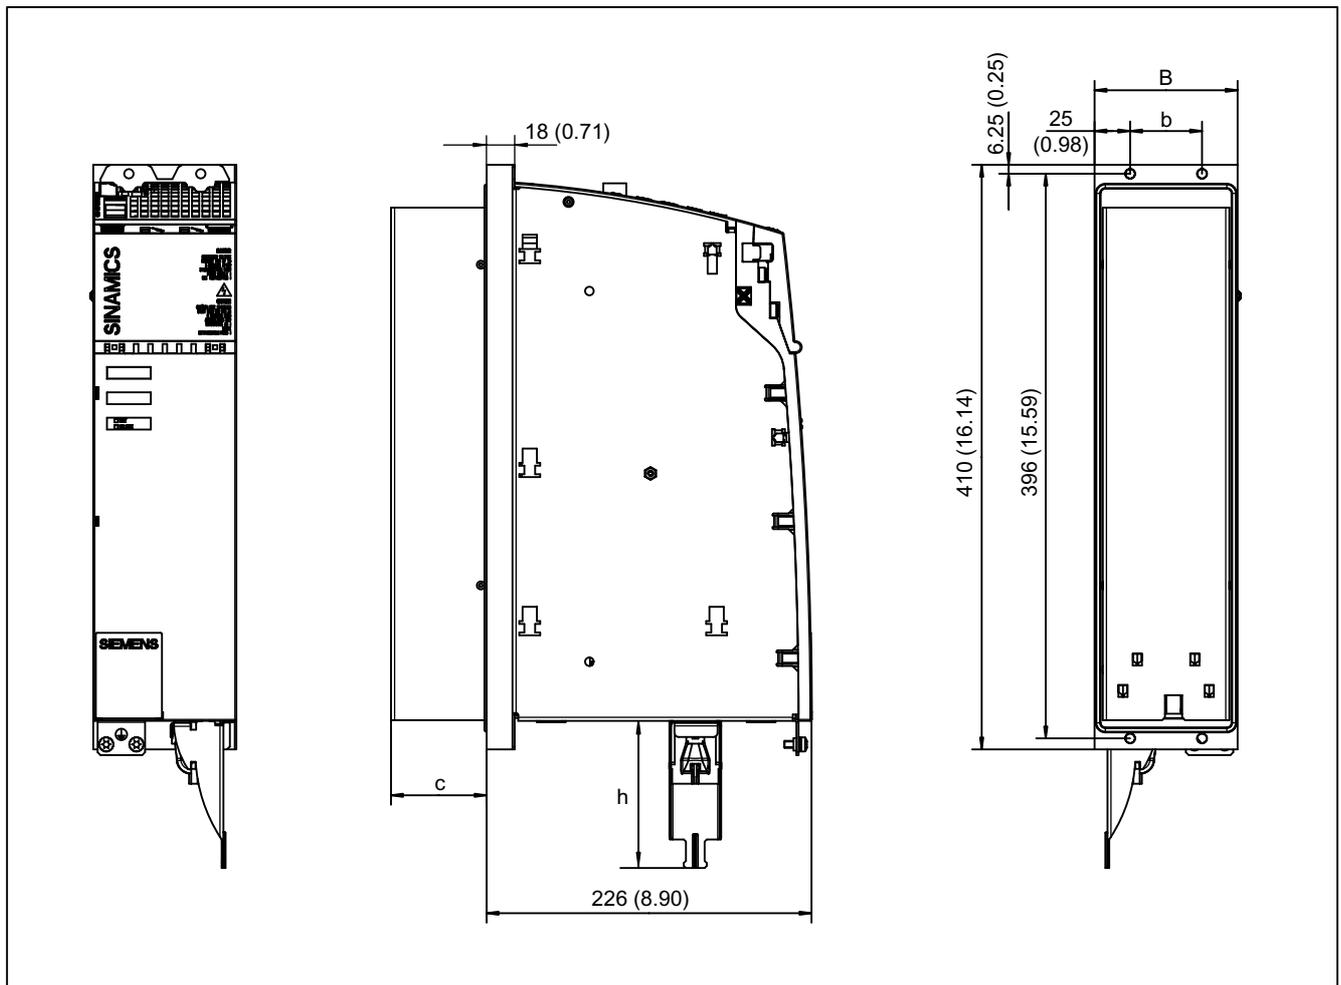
Dimension drawing of Motor Modules with external air cooling 30 A and 2 x 18 A, all dimensions in mm and (inches)
